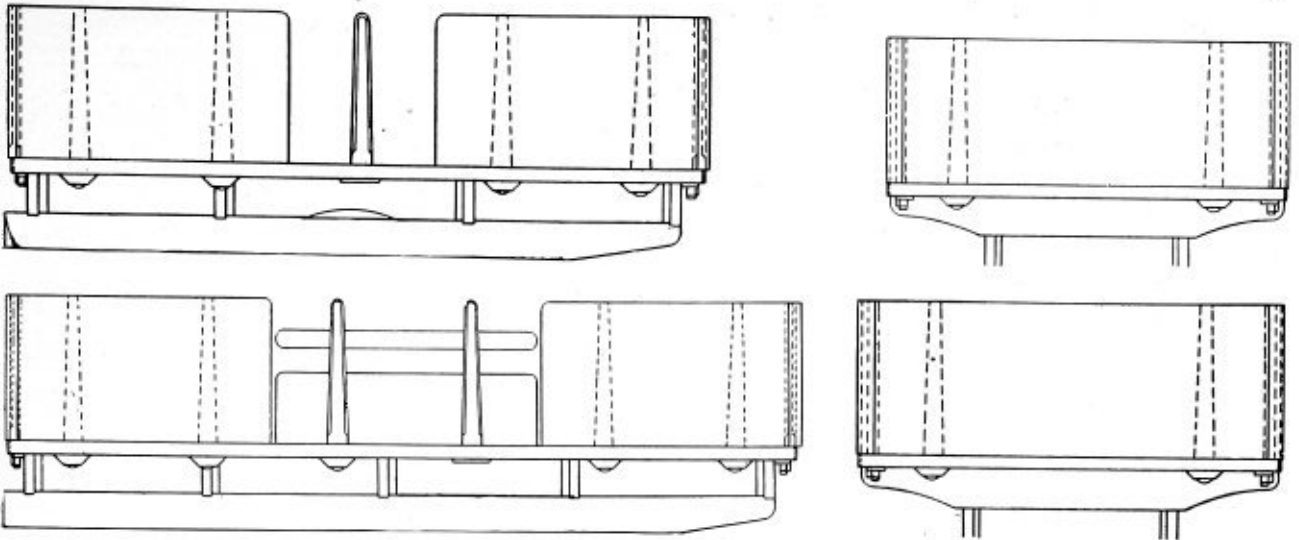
ANOTHER TYPE OF STAKE BODY EVOLVED FROM STANDARD UNITS AND MOUNTED ON SHORT AND LONG WHEELBASE CHASSIS
